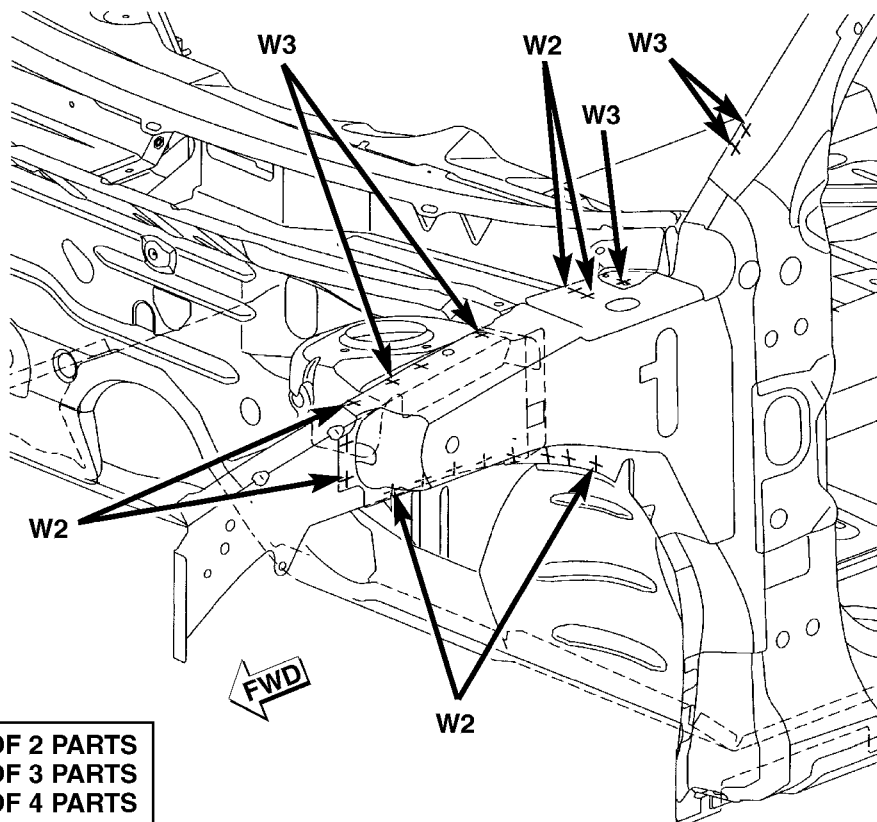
FRONT FENDER SUPPORT TO COWL AND OUTER BODY SIDE APERTURE
